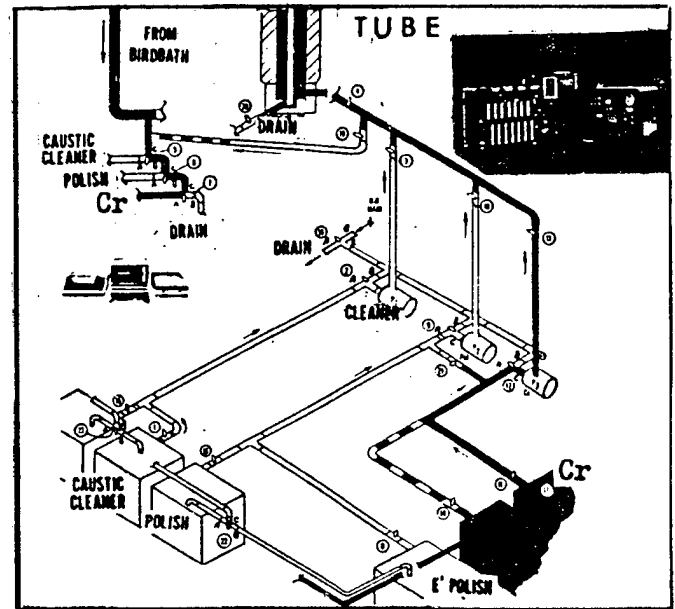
A "Pump Thru" Plating System for Plating Long Cylinder Bores.
